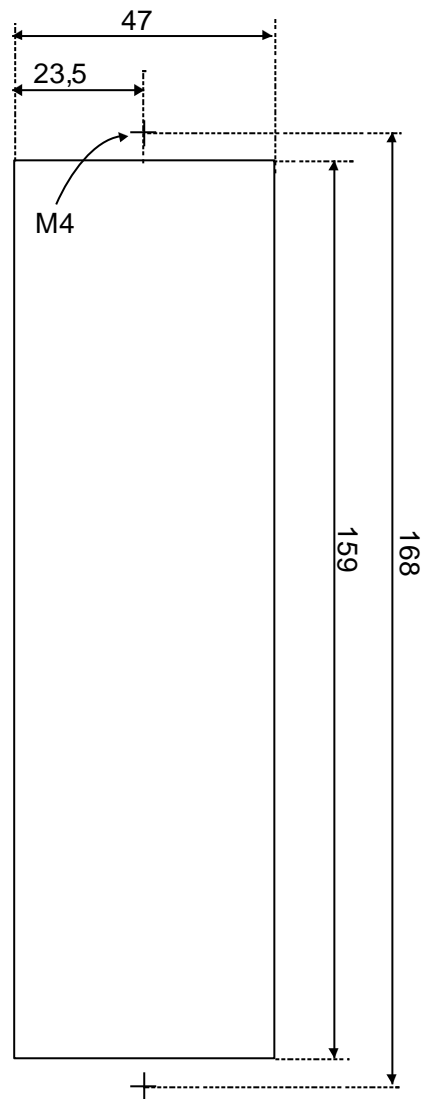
AQ102 cut out for panel mounting (millimeters)
